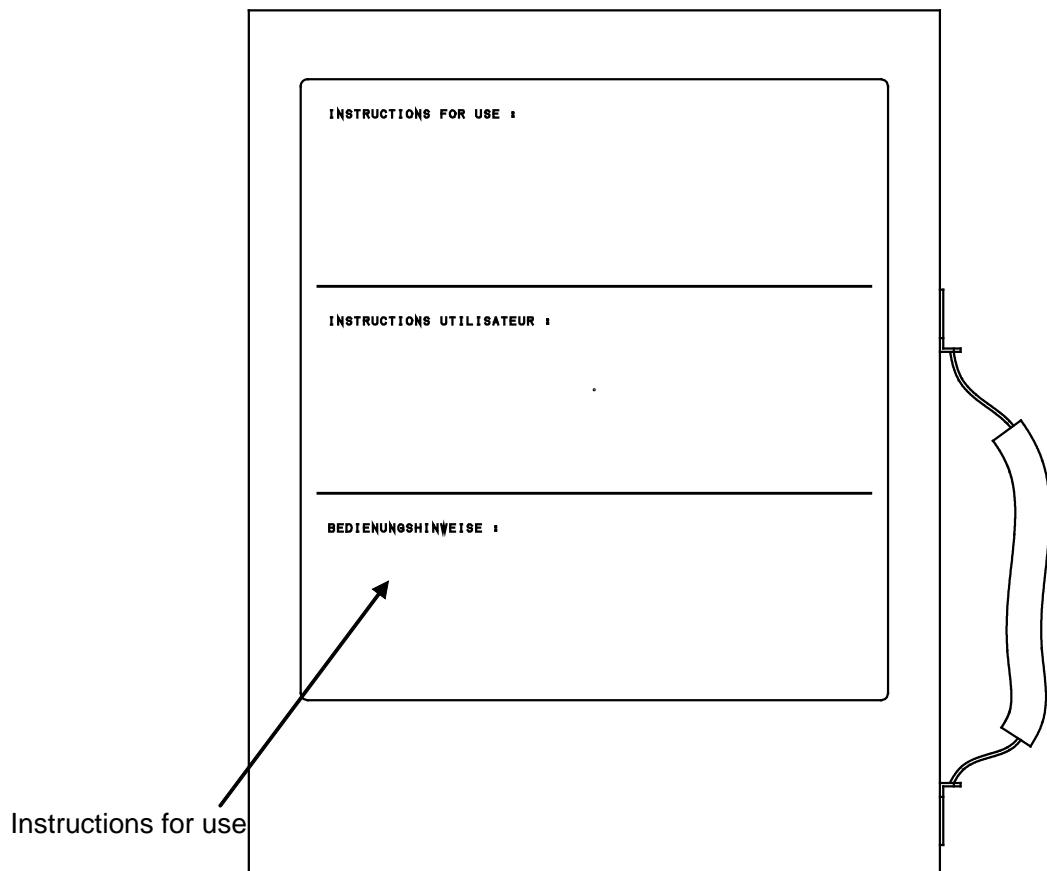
(b) Dimension of Brake Release Unit (Rear view)
